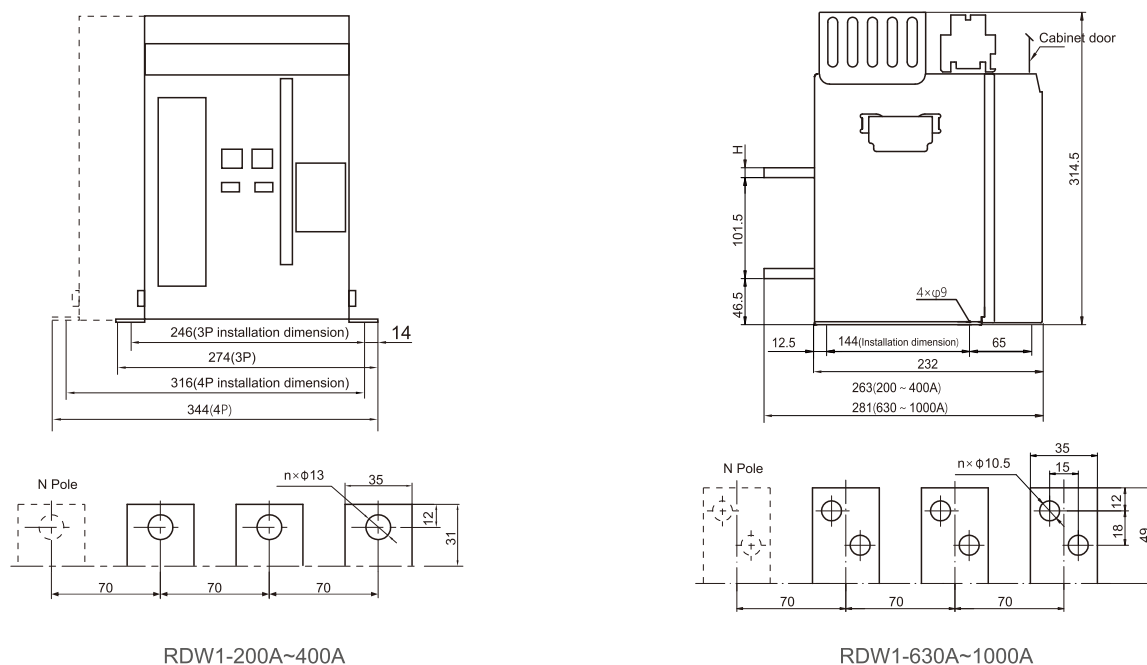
(B) Dimensions and installation dimensions of ground fault protection device
